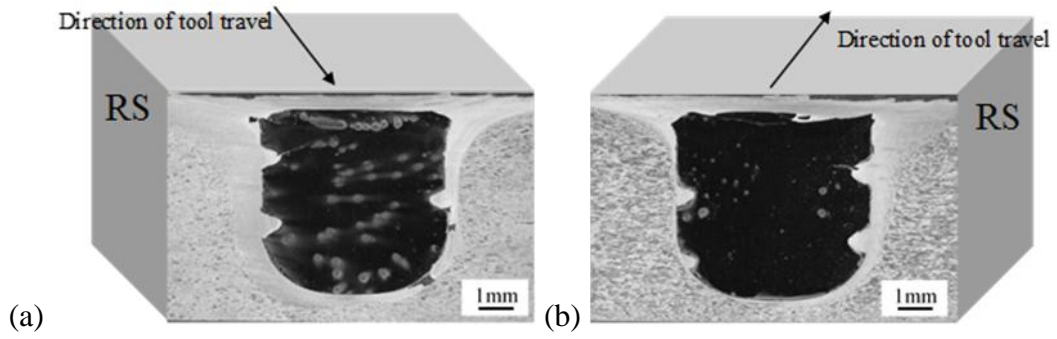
The mating transverse sections from the tool break location at 150 rpm 8.7cm into the length of the weld.
